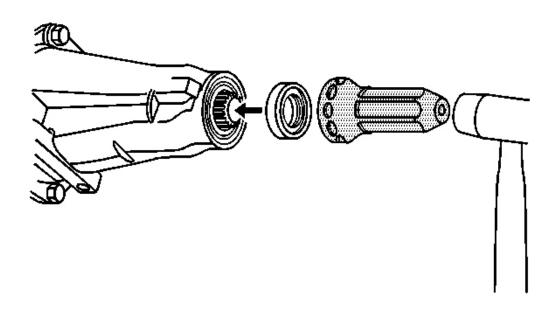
View Of Case Extension Housing Rear Oil Seal & J 21426 Courtesy of GENERAL MOTORS CORP.
